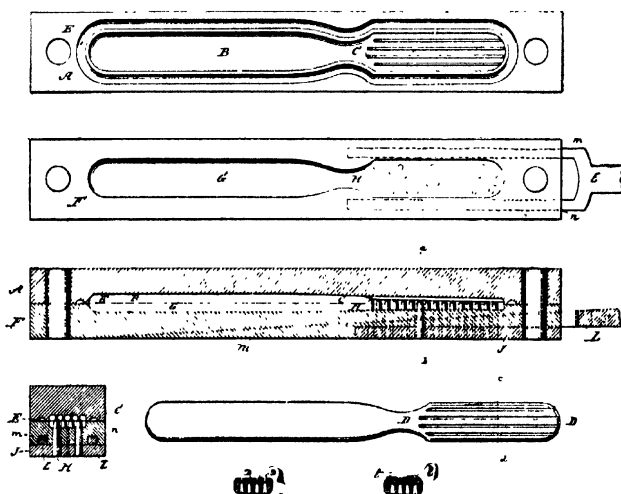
The Miller Method of Celluloid Tooth Brush Manufacture.
